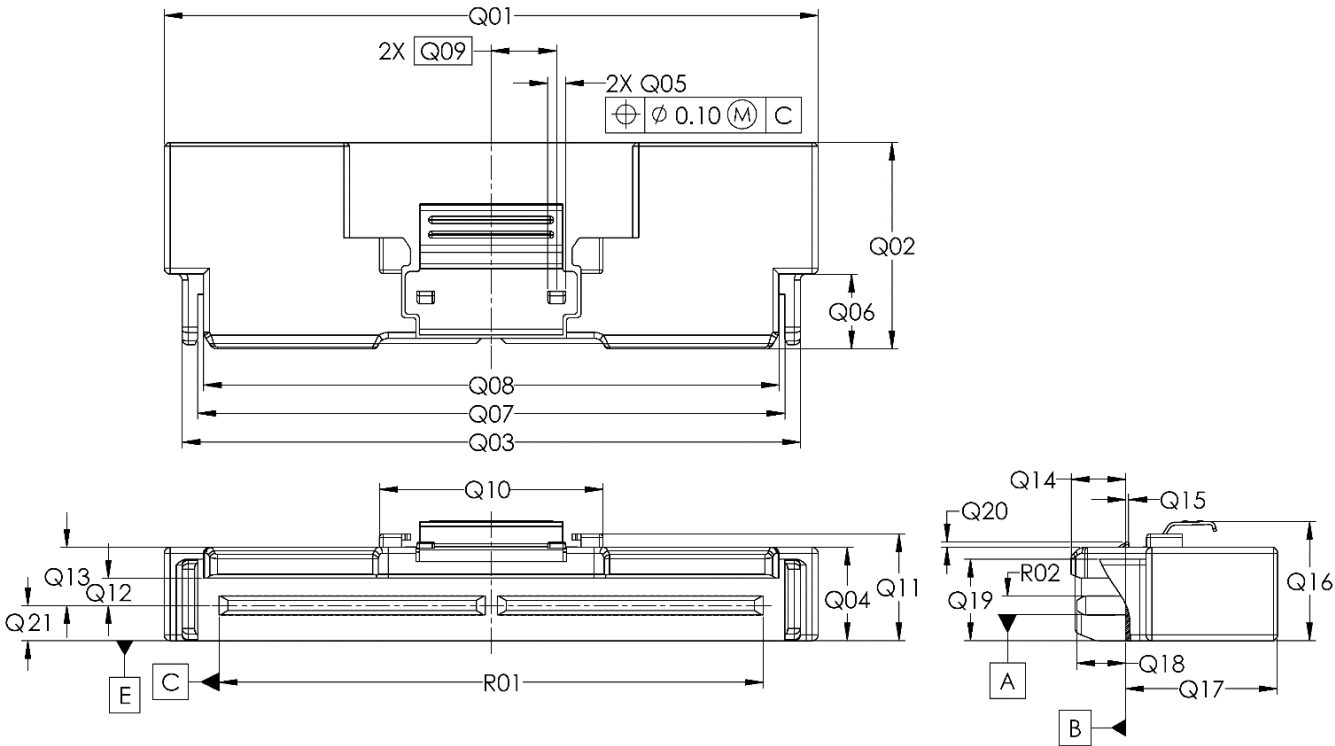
Straight Plug with Side Anti-skew Flanges for 148 Contacts
